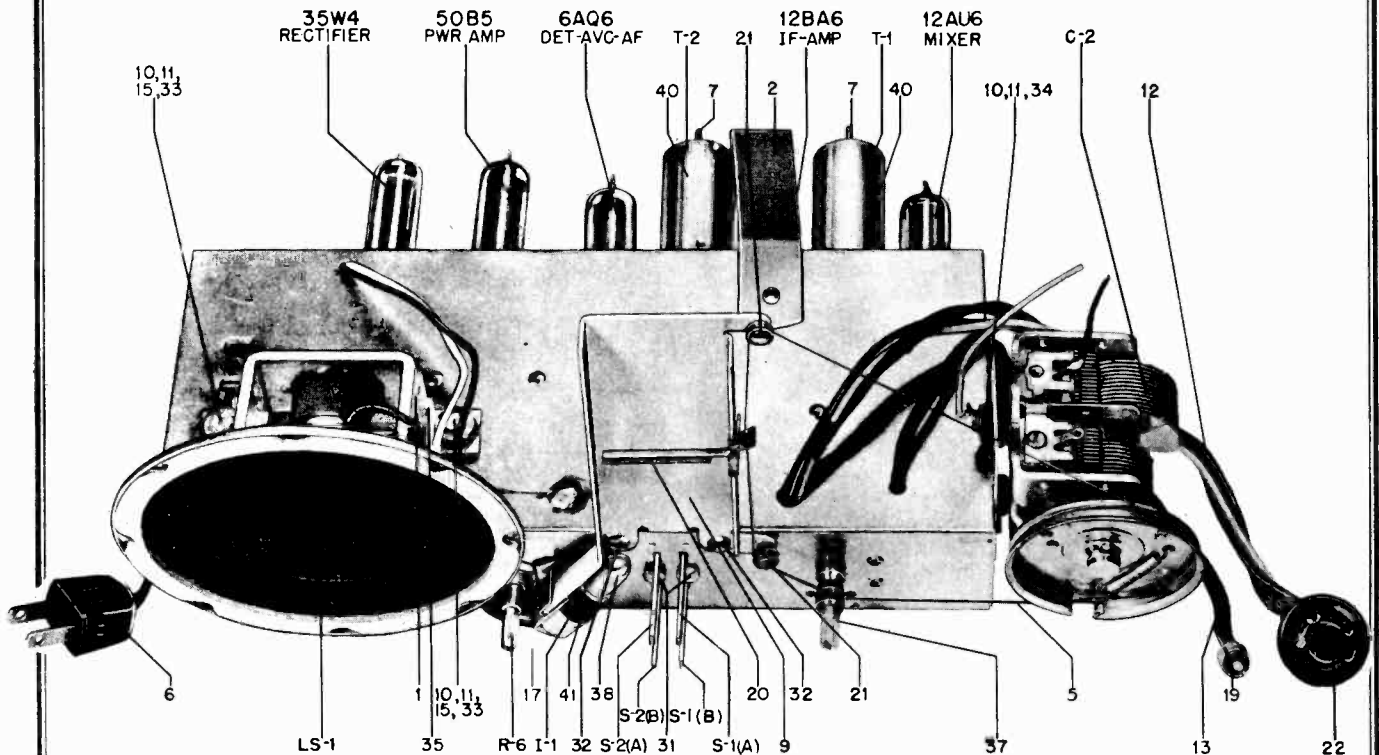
CHASSIS HS-124 PARTS LOCATION - TOP VIEW
